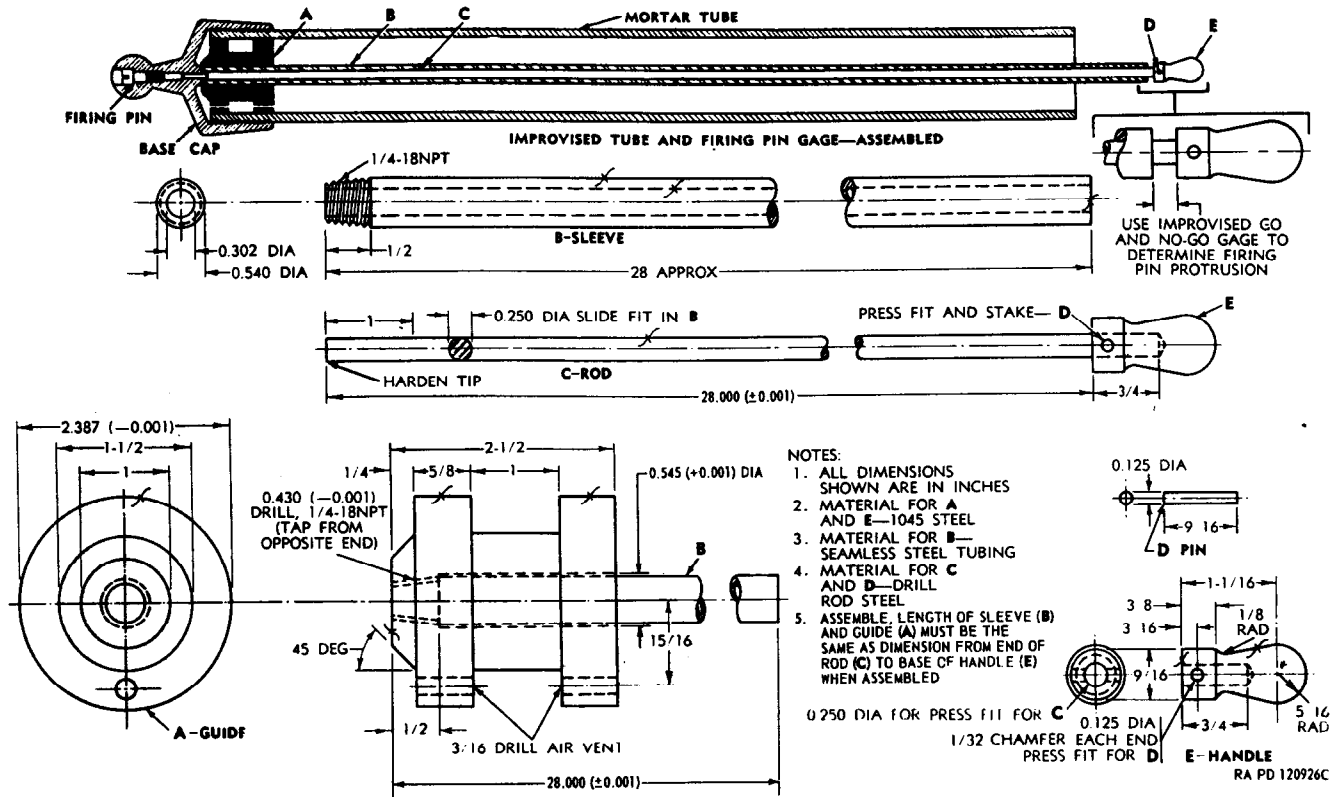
Improved tube and firing pin gage for 60-mm mortars.
